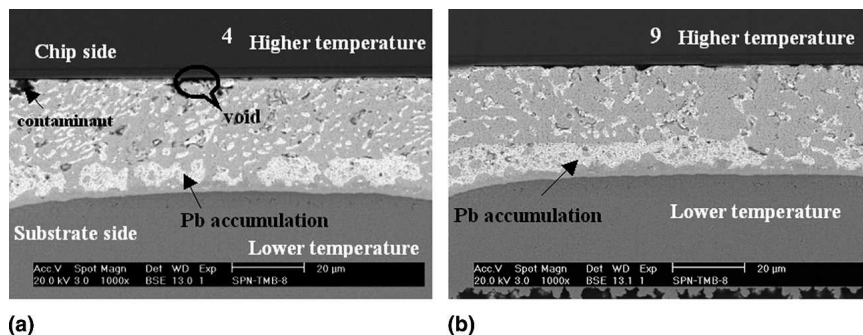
Cross-sectional plane after the first polishing (outer solder). (a) Local magnified SEM micrograph of unpowered solder joint 4 and (b) unpowered solder joint 9.
